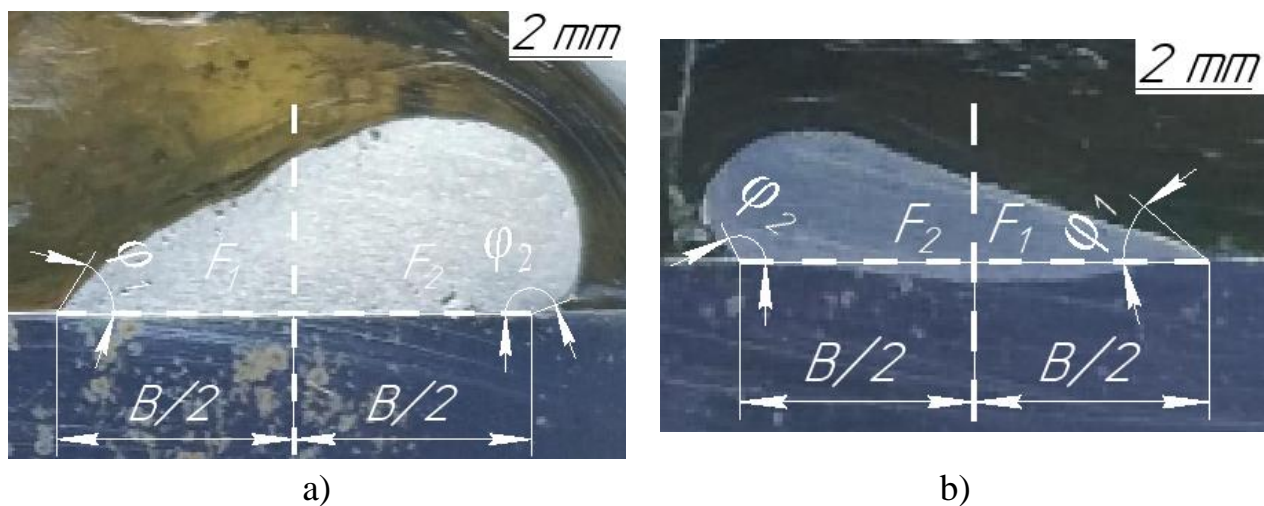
Macrostructure of welds deposited by composite filler rods:
